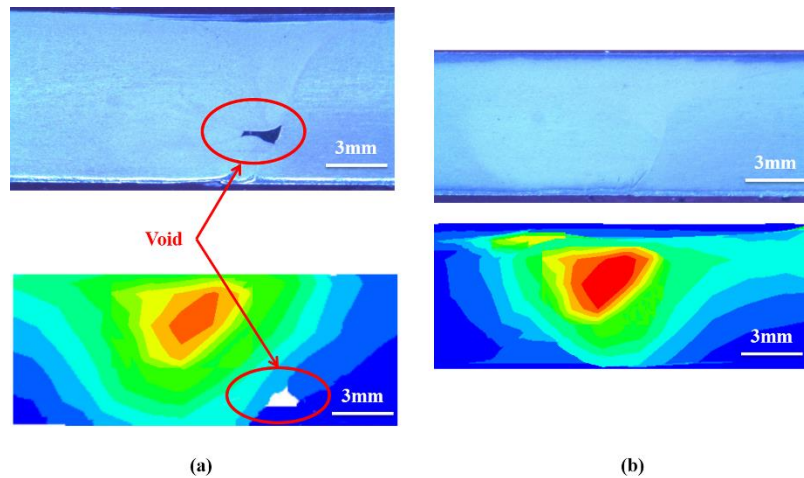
(a) Void Formation at 600 rpm with tool tilt angle of 0^0 (b) Defect free weld at 1000 rpm with tool tilt angle of 0^0
